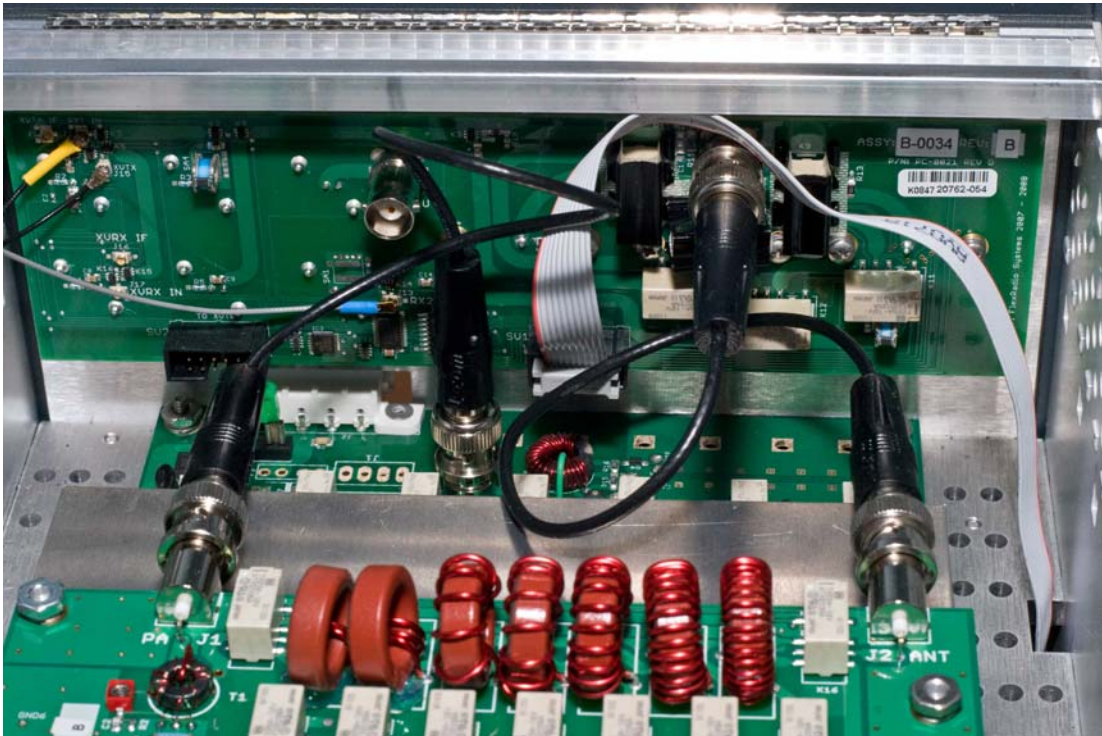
Flat washer, internal tooth lock washer, and hex nut securing the ATU
